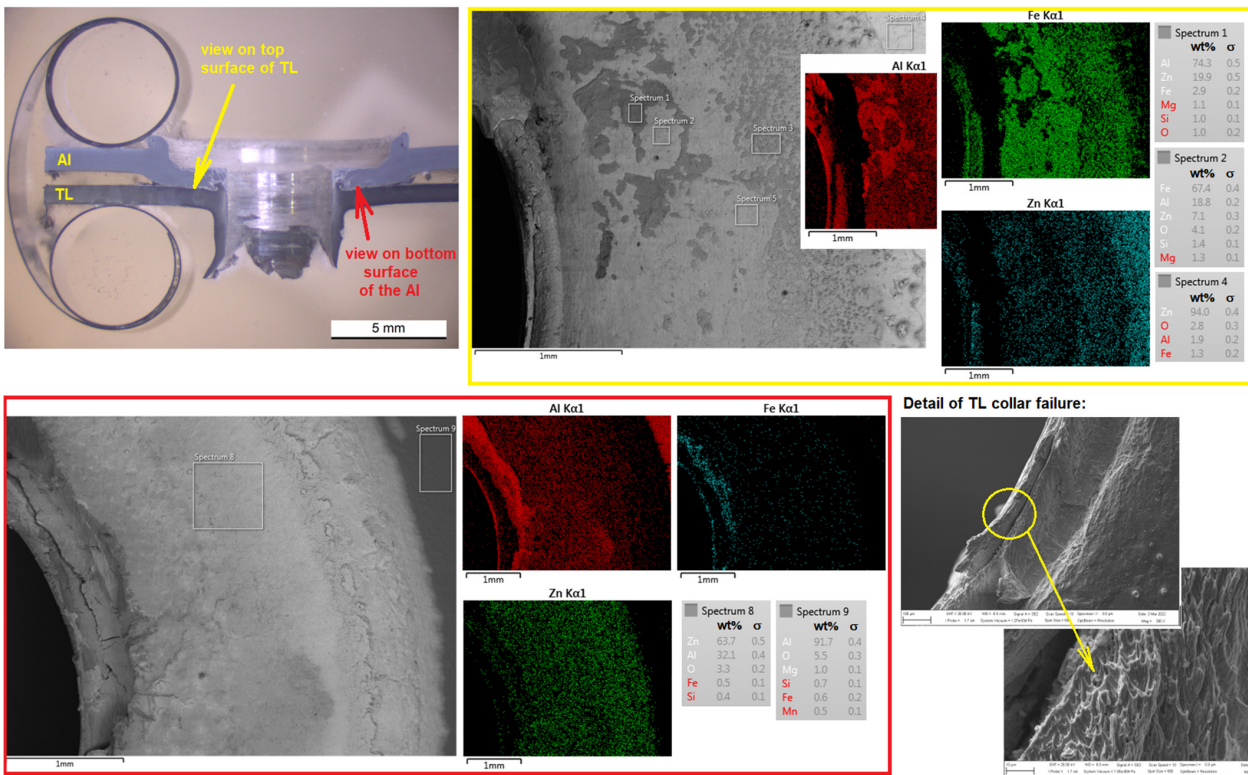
SEM analysis of Al-TL joint, element maps, EDS spectra, and fracture surfaces of bushing. The yellow border contains a detailed view on the top surface of the lower material. The red border contains a detailed view on the bottom surface of the upper material.
